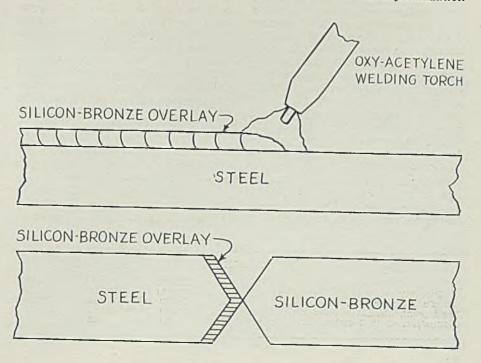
Showing joint set up for welding silicon bronze to steel structures to be welded. Then, too, the oxyacetylene process is employed to make some joints. The temperamental properties of the silicon bronzes in rigid structures, however, rule out the oxyacetylene process as cracks occasioned by the hot shortness of the silicon bronzes at elevated temperatures, where strength and ductility are low, work to the disadvantage of the flame welding process. So metallurgical attributes of the silicon bronzes and the dictates of economy combine to favor the carbon arc process.
